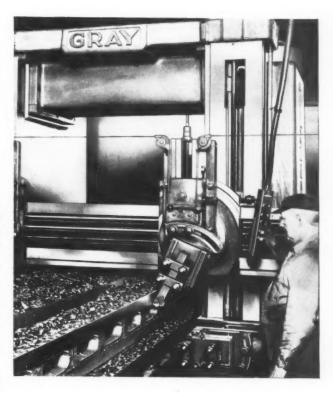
Planing a Long Cast-iron Planer Table with a Carbide-tipped Tool, Using a 3/8-inch Depth of Cut and 0.045 Inch Feed at a Surface Speed of 150 Feet per Minute, Interrupted Cuts being Involved
